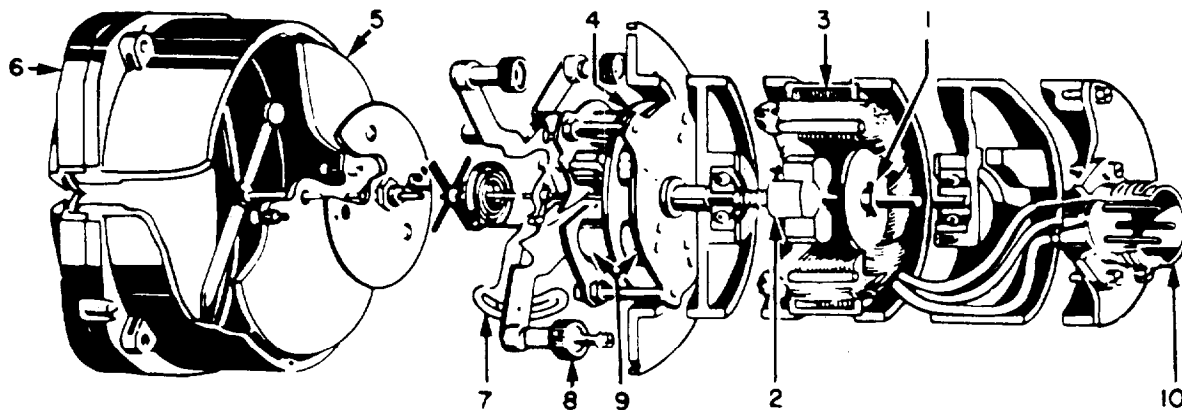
shows a cutaway view of a single-element tachometer (radial) indicator. The unit consists essentially of two parts a synchronous motor and an indicating element. The motor runs in synchronism with the tachometer generator. It also drives the indicating element through a magnetic-drag coupling. The indicating element indicates the speed of the synchronous motor, and, therefore, the speed of the aircraft engine.
